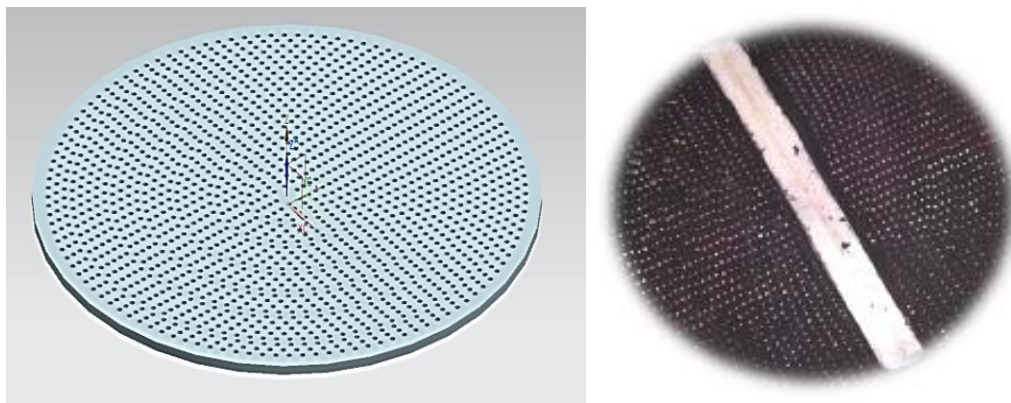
CAD model (left) and printed structure after coating with activated carbon (right)
